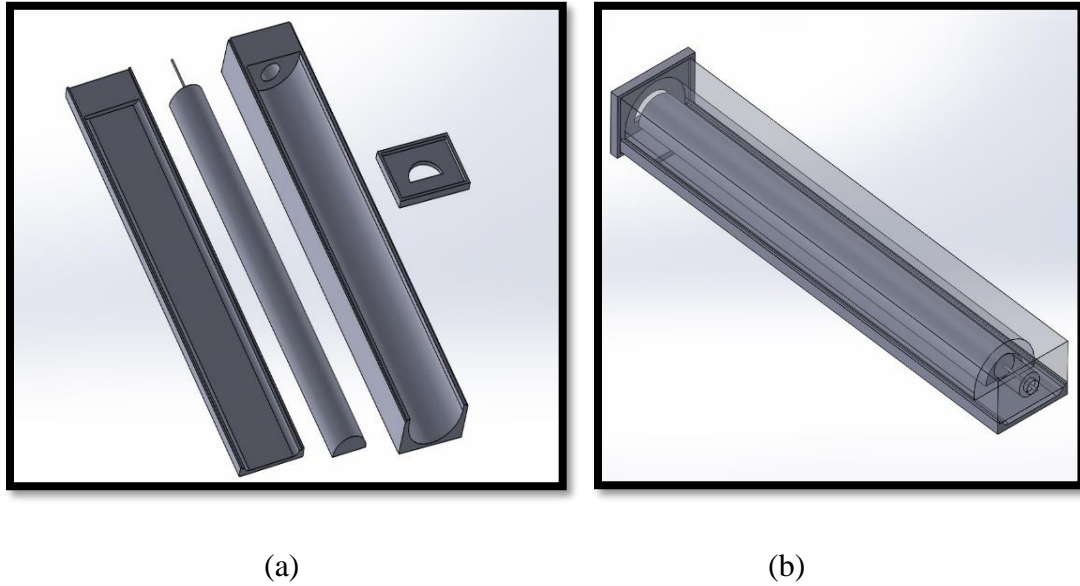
(a)Fiber-Reinforced with 5 mm winding spacing outer mold design and parts. (b)Fiber-Reinforced actuator outer mold parts assembled on SolidWorks.
